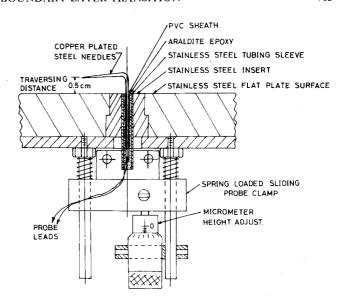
Flat plate hot wire and traversing mechanism arrangement.
